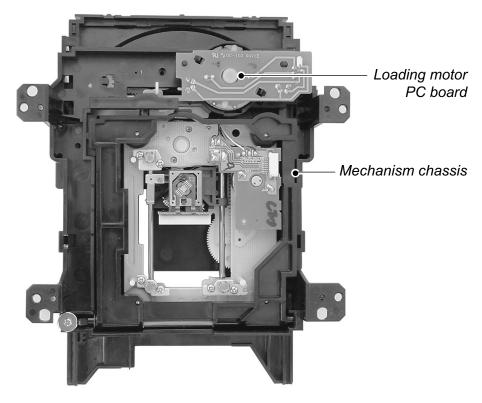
Mechanism chassis assembly (Bottom side)
